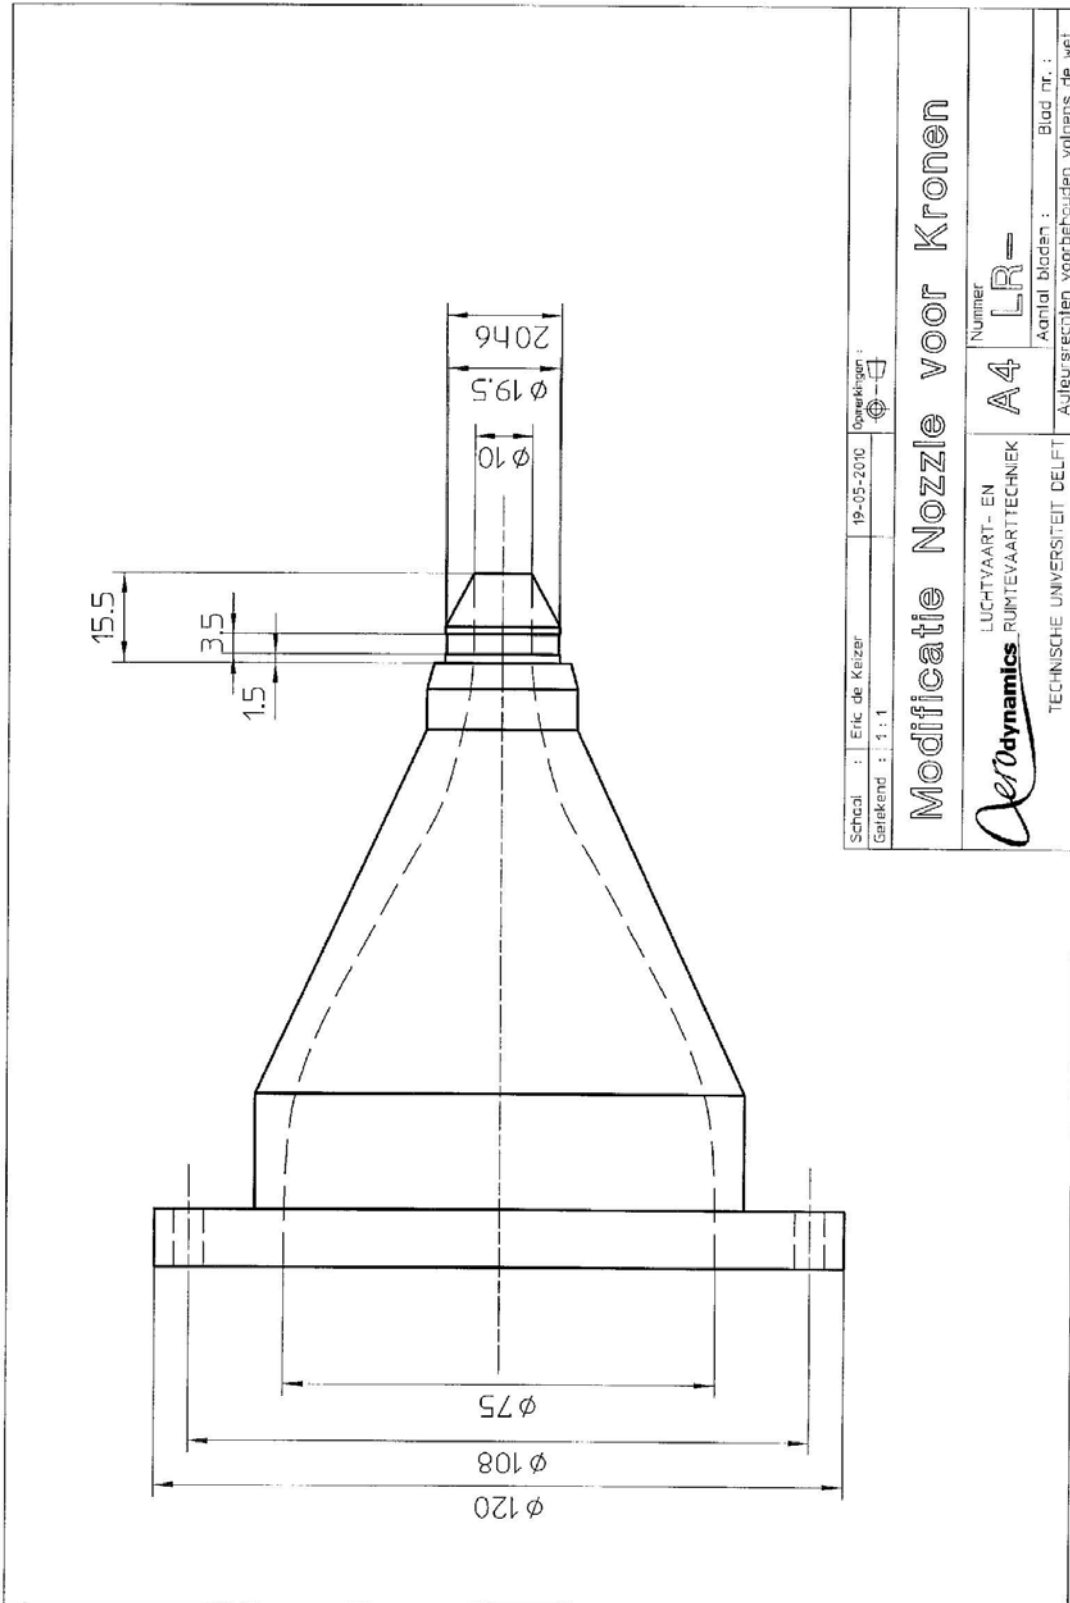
Nozzle dimensions (Courtesy:Eric de Keizer)
